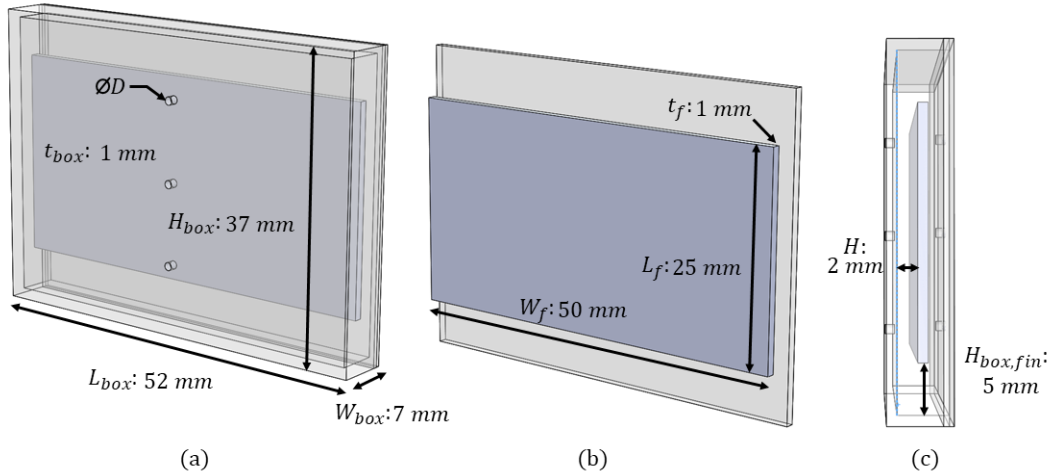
General model setup for multi-jet impingement on parallel plate fin. (a) Dimensions of the box enclosing the parallel plate fin. (b) Dimensions of the parallel plate fin. (c) Location of the fin inside the box.
